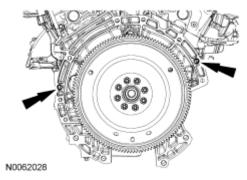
Locating dowel pin from torque converter housing Courtesy of FORD MOTOR CO.
